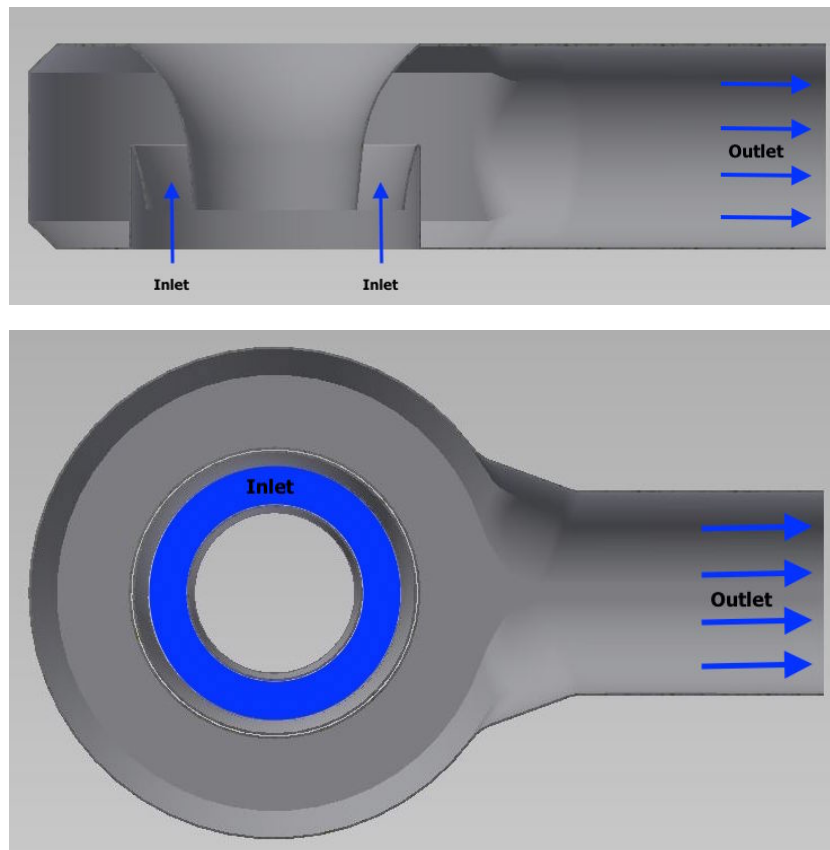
Cylindrical RCP casing, vertical and horizontal section view
